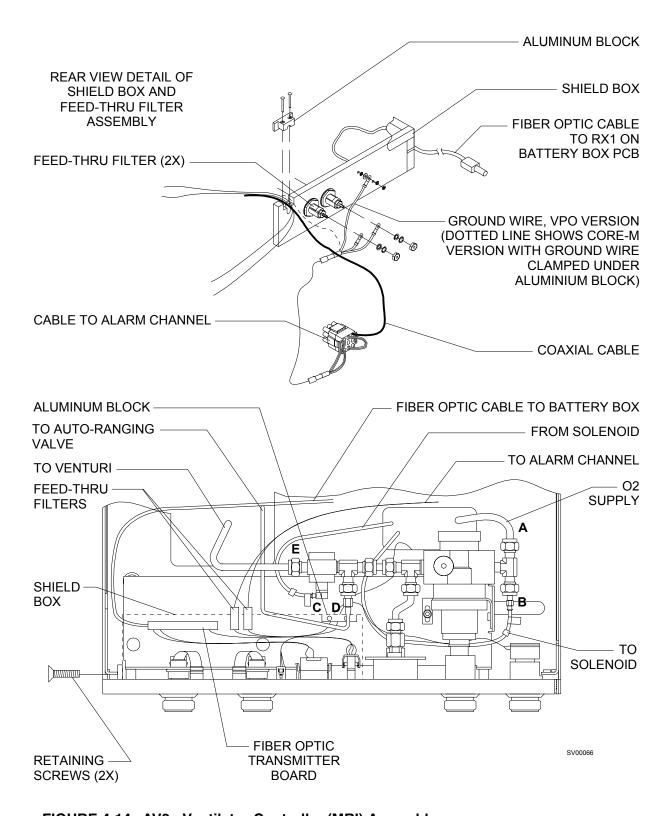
AV2+ Ventilator Controller (MRI) Assembly
